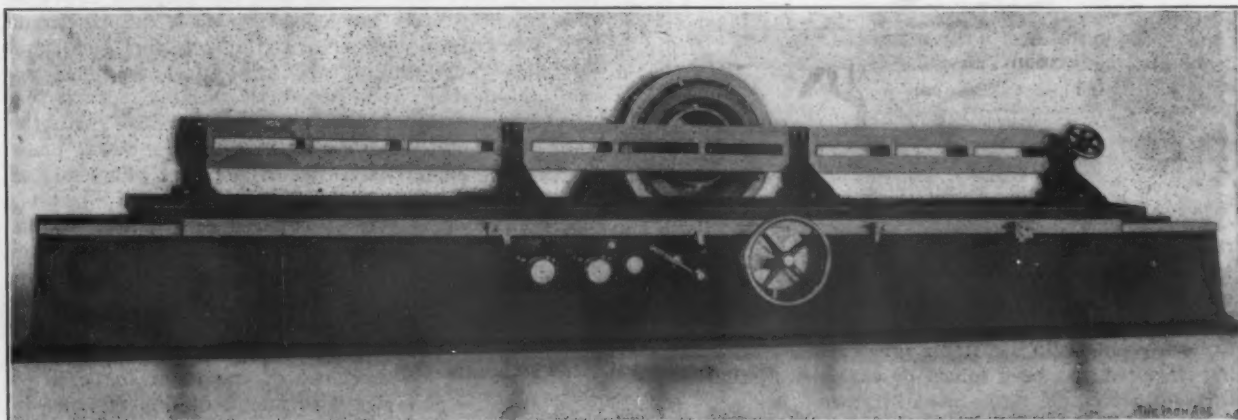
Front View of a New Grinder for Large Shear Knives, Built by the Safety Emery Wheel Company, Springfield, Ohio.
